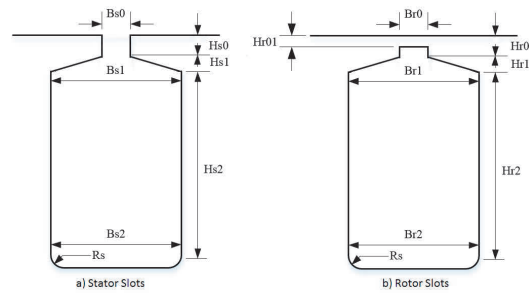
Definition of slot dimensions for (a) stator slots, and (b) rotor slots.
